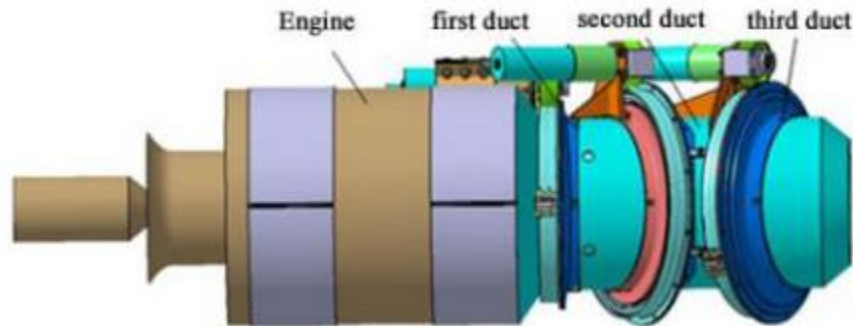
3BSD nozzle model of Lanzhou Jiaotong University
